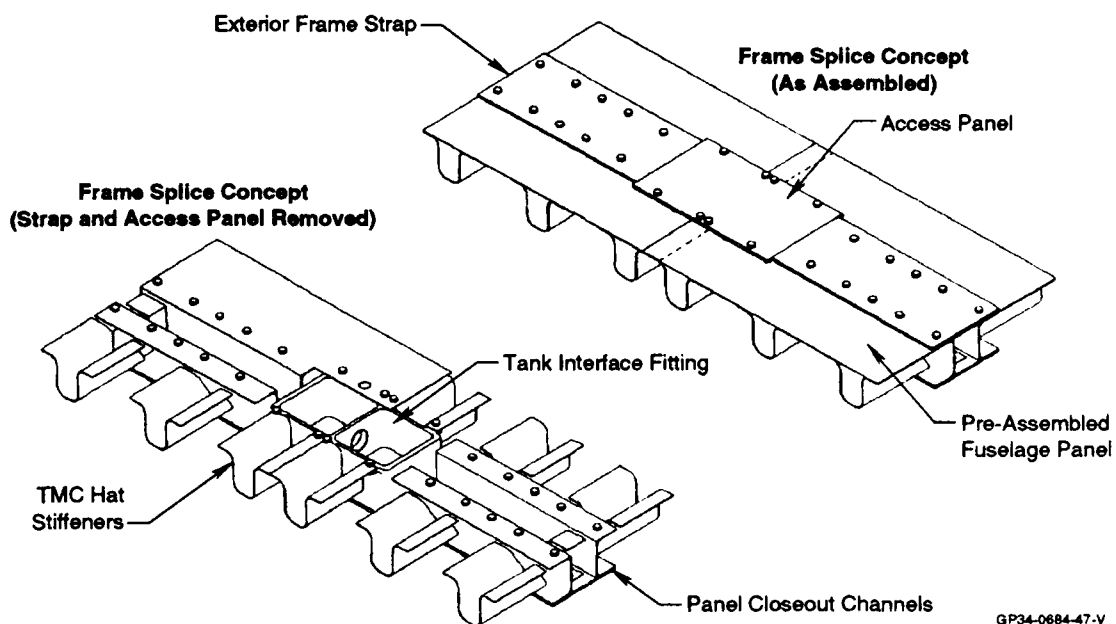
Full Scale Assembly Joint Addresses Critical Requirements
